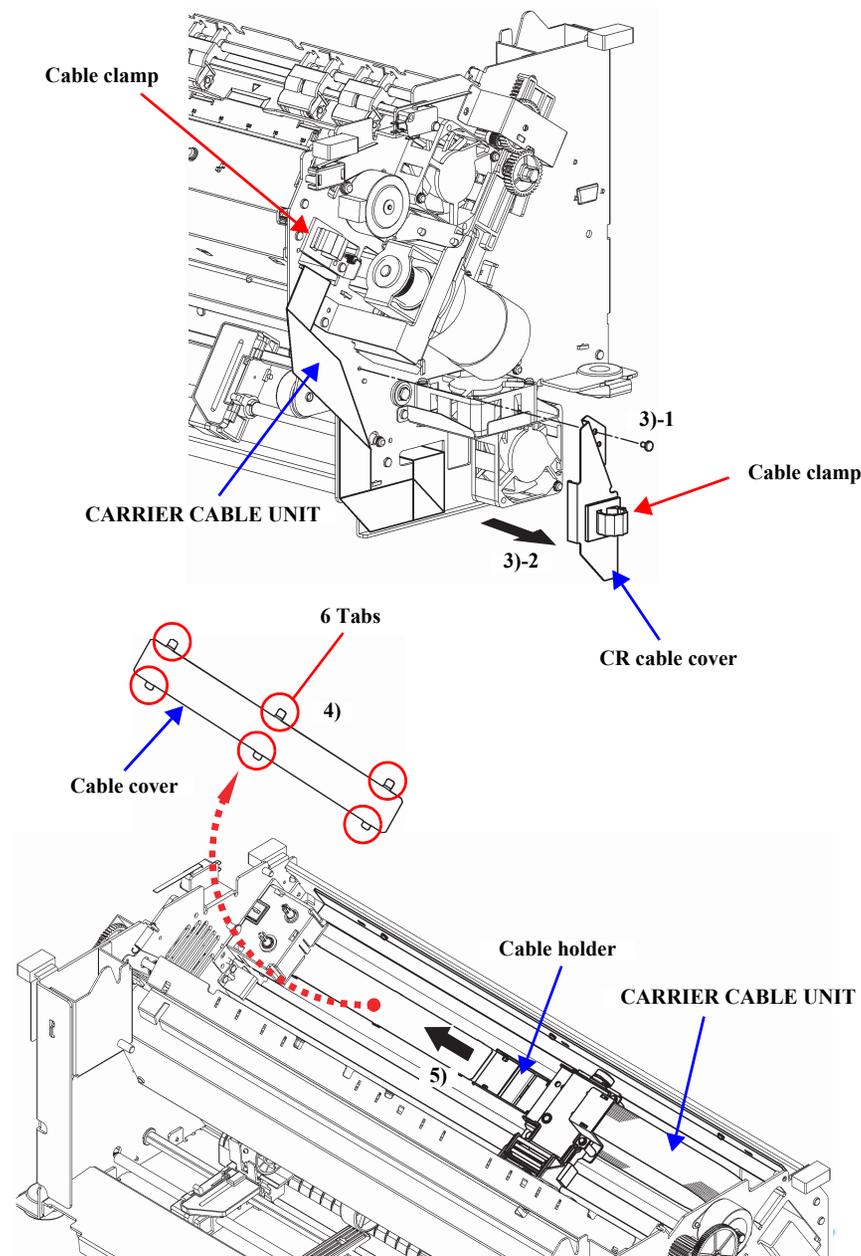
CARRIER CABLE UNIT Removal (1)
